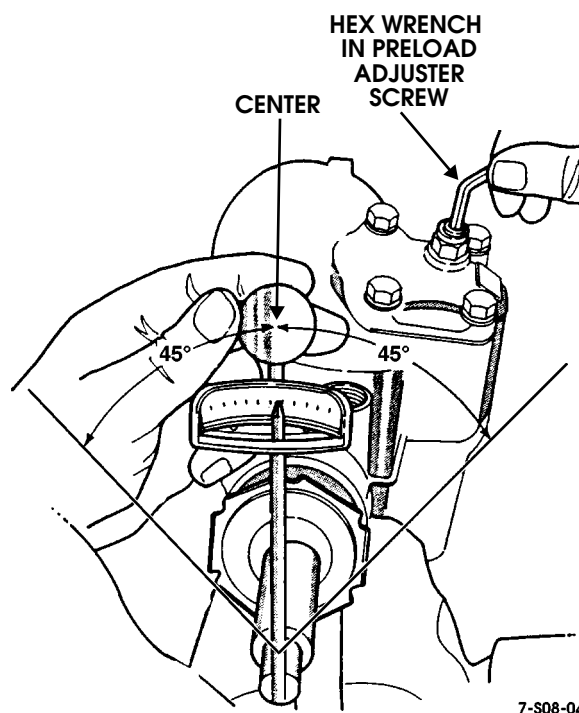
Checking / Adjusting Pitman Shaft Over-Center Preload
